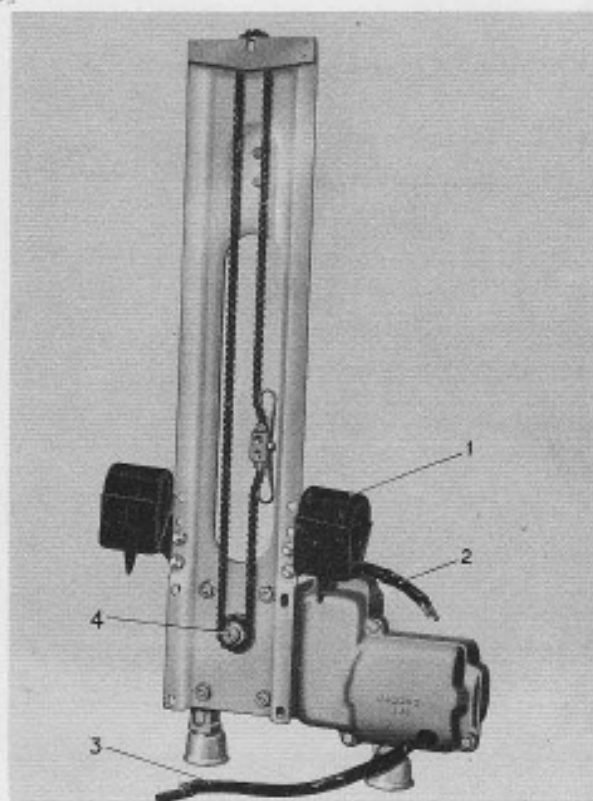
Reverse side of motor and mechanism for left-hand rear door.
